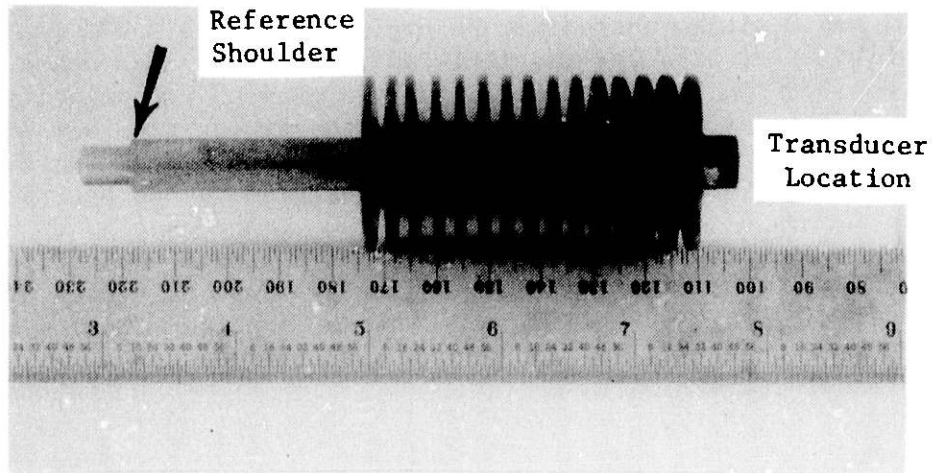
Knurled SS Waveguide with Cu Cooling Fins, Reference Shoulder, and Tip for Stud Welding.
